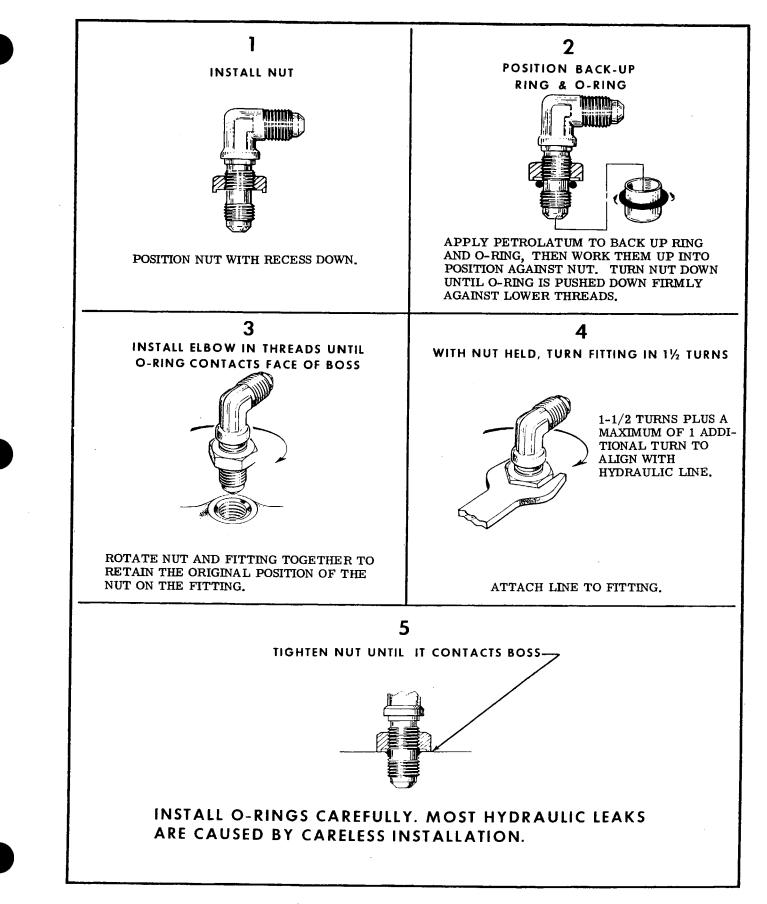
A-4. Installation of Hydraulic Fittings (Sheet 2 of 2)
